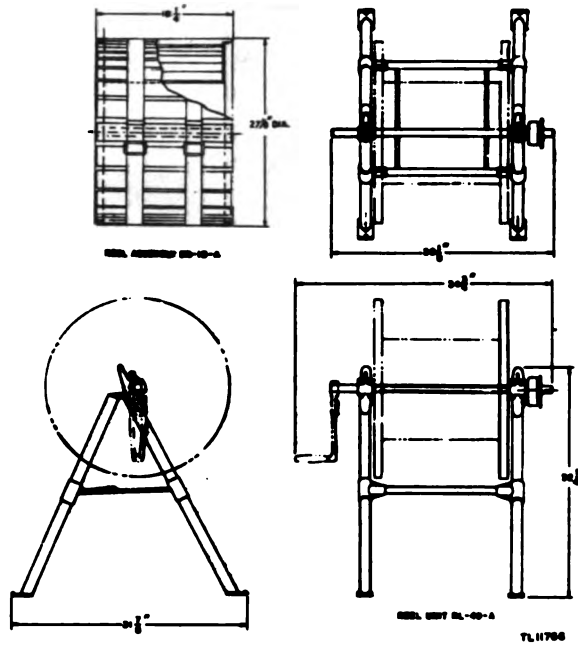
Outline drawing of Reel DR-10-A and Reel Unit RL-49-A.
